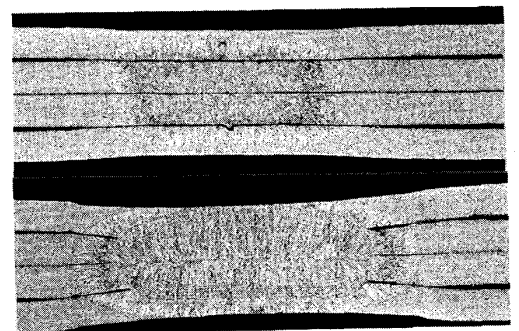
Cross-Section of Spot-Welded Samples.
